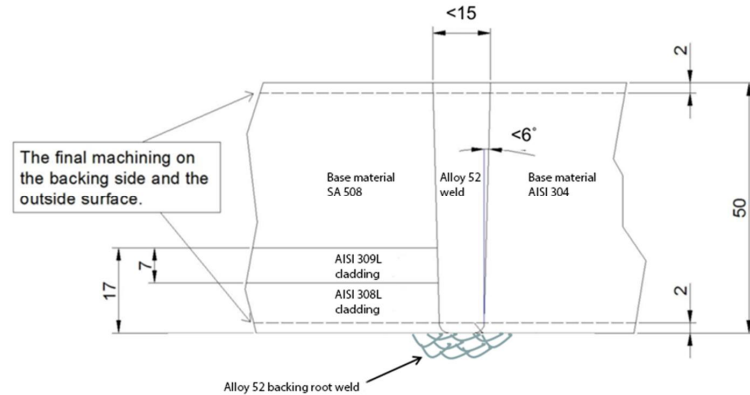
Technical drawing showing the dimensions and materials of the NG-DMW mock-up.
